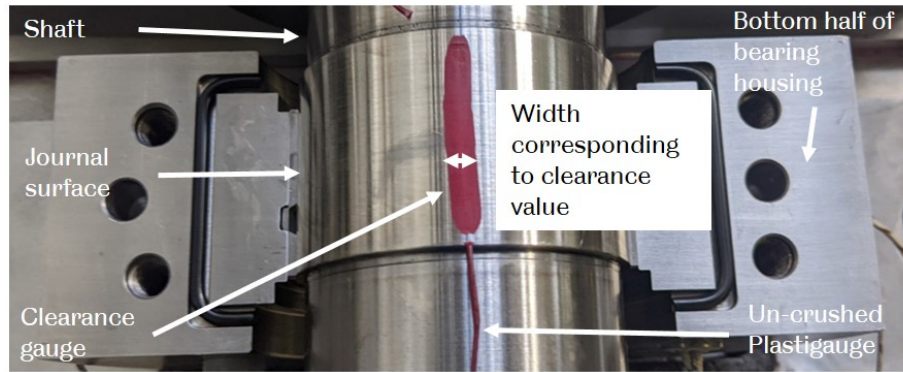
Red mark on bottom bearing shell left by the clearance gauge
